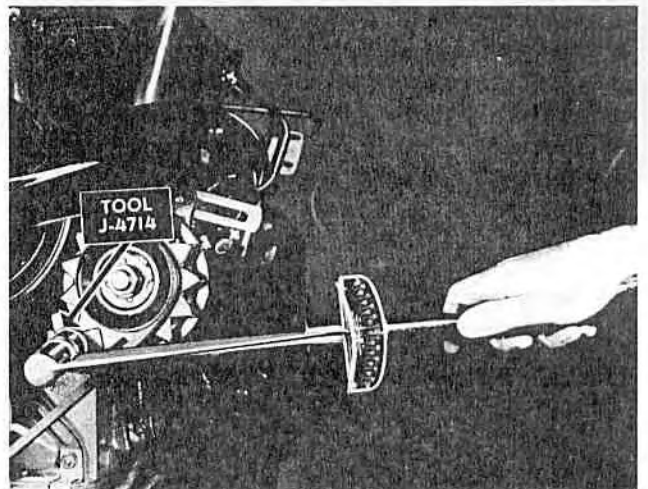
Adjusting the Fan Belt Using Tool J-4714 and a Torque Wrench
